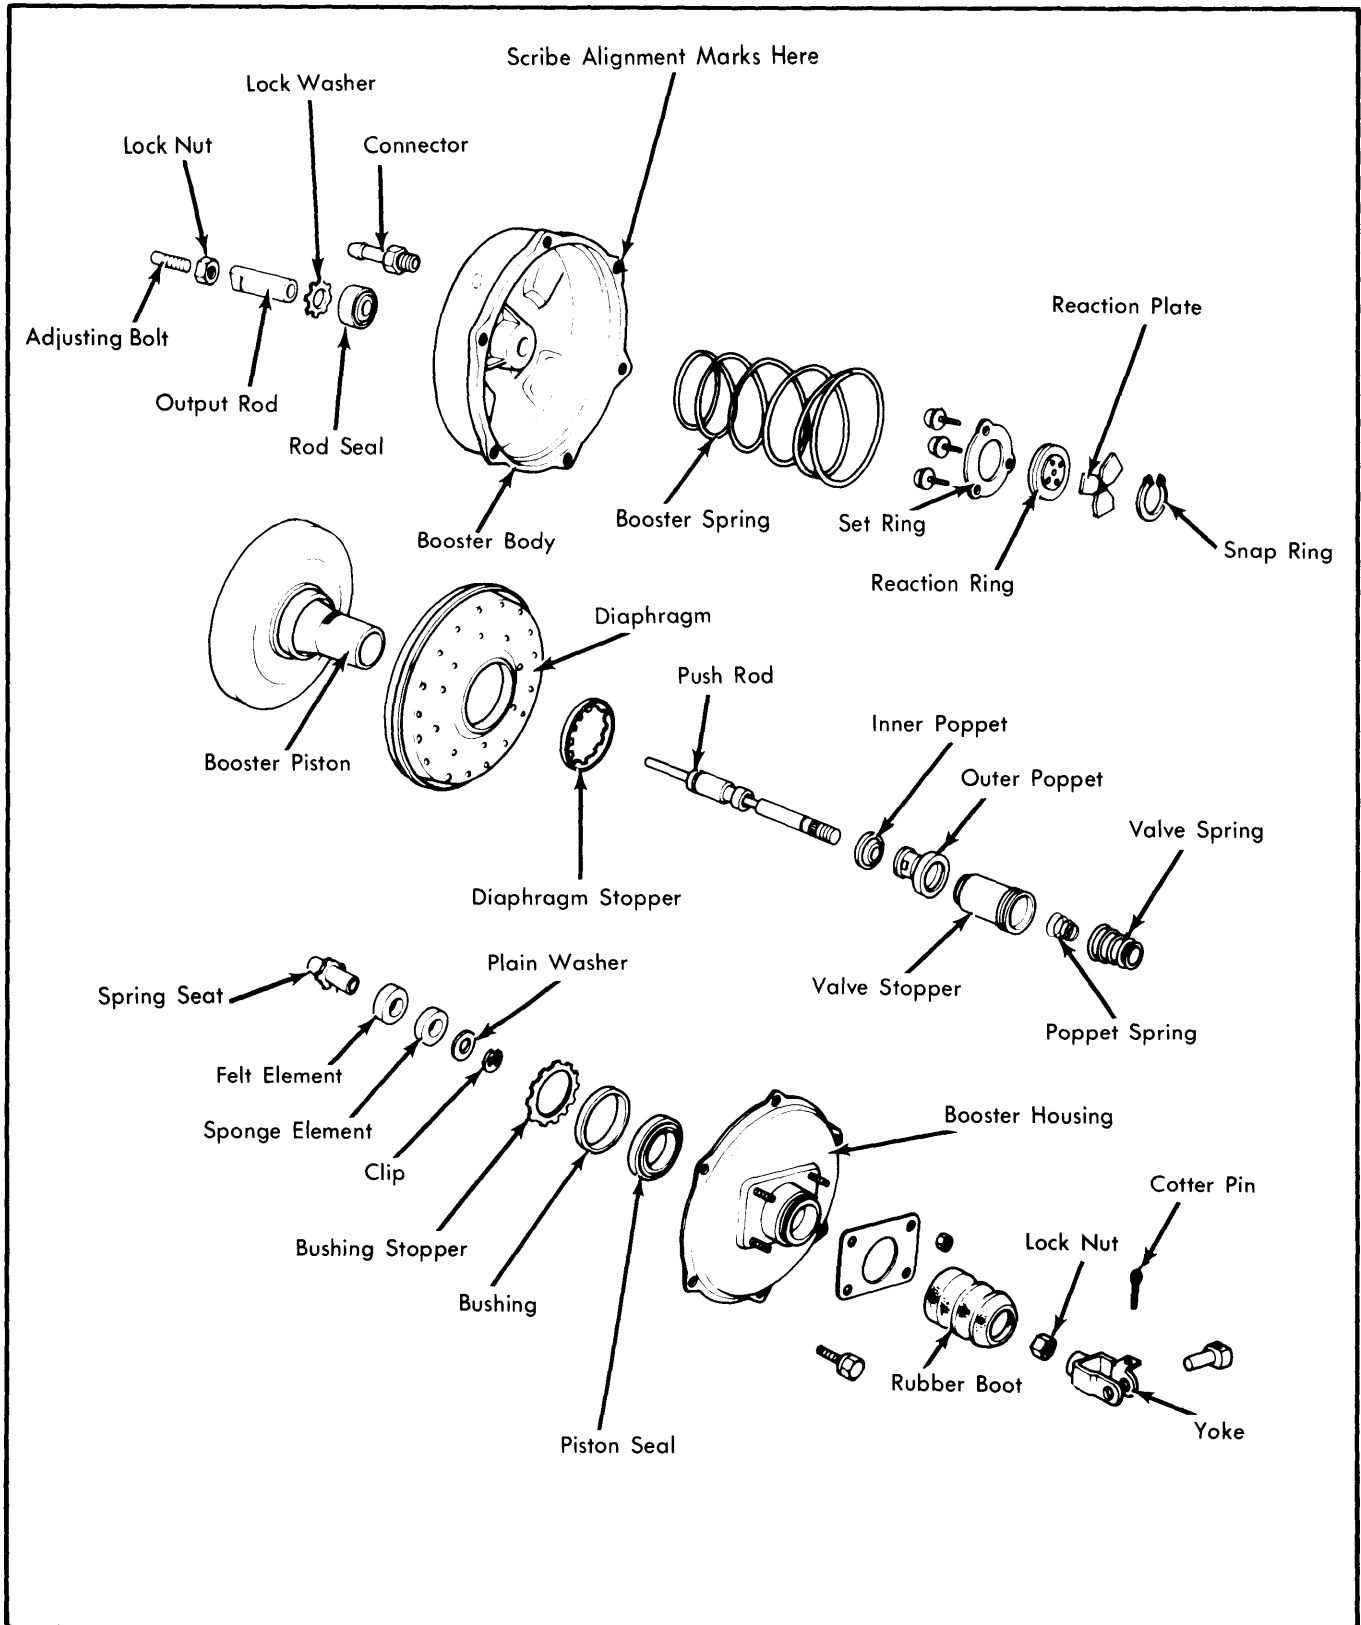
Exploded View of Honda Accord Power Booster Assembly – Other Models Similar
